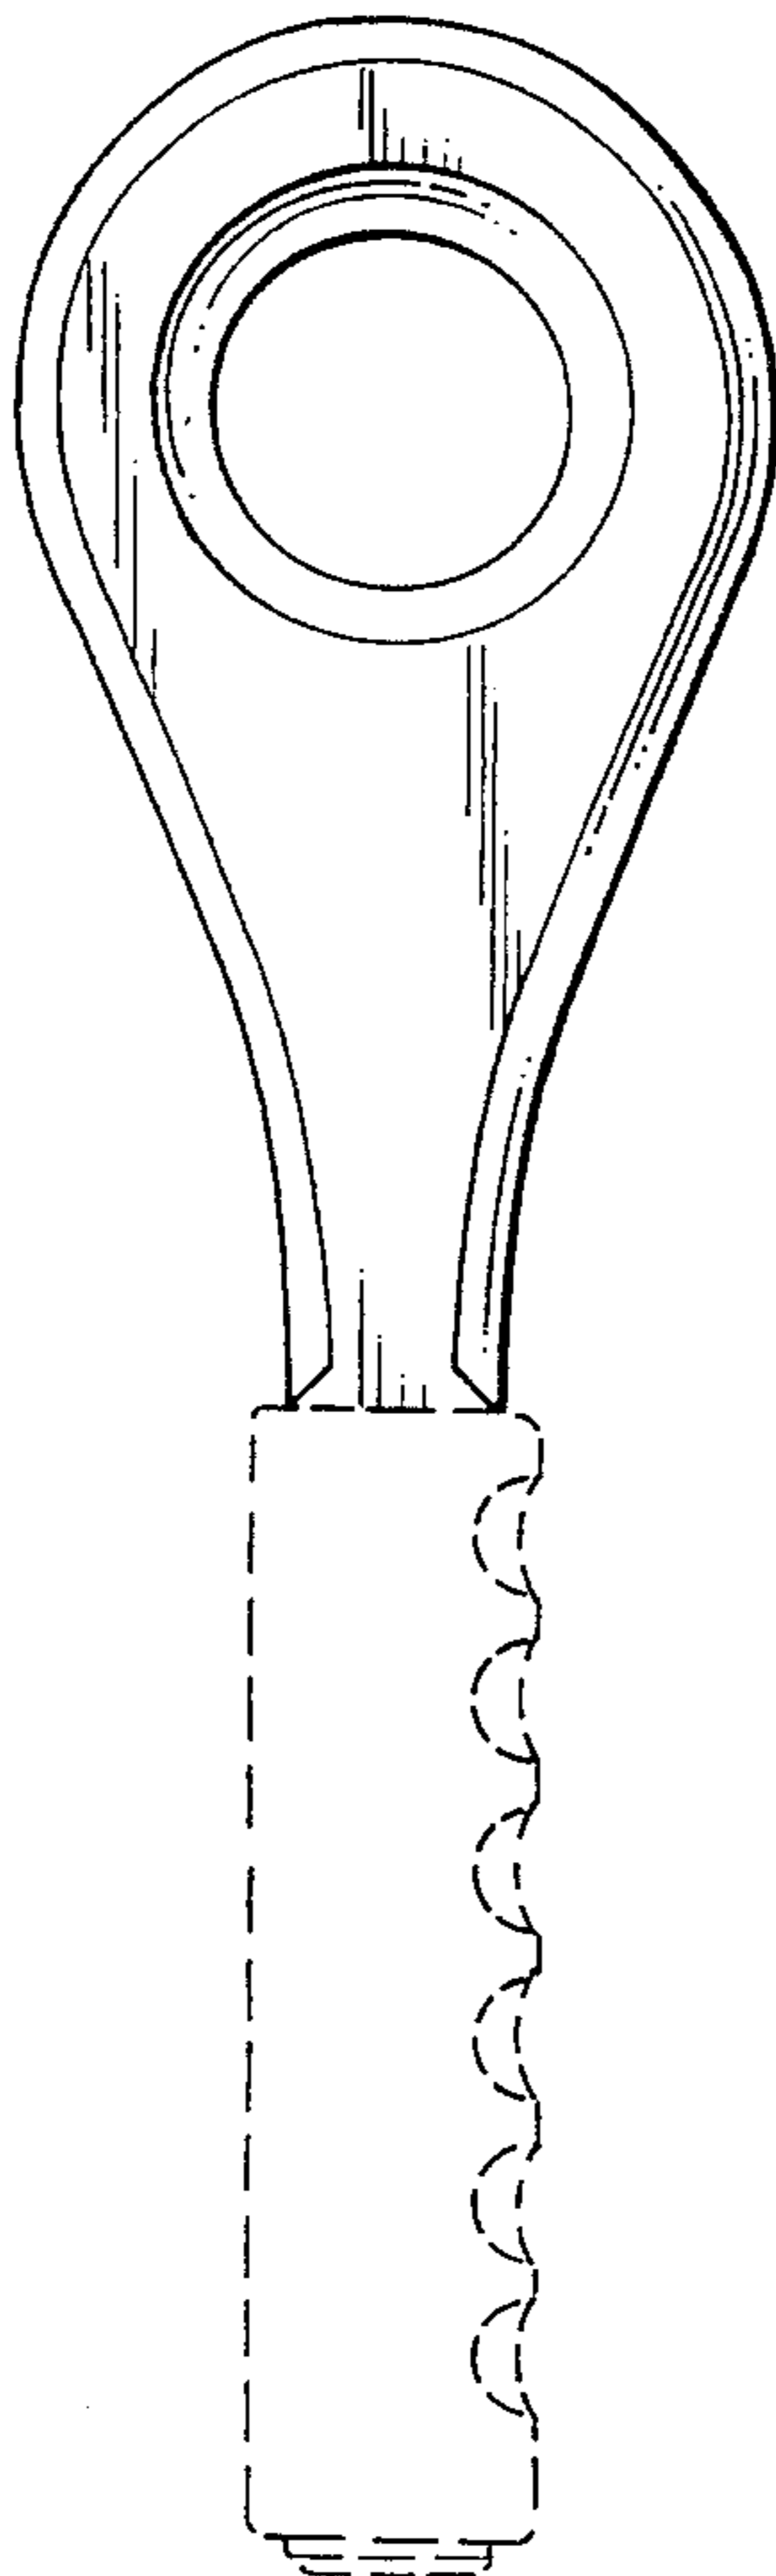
is a right side elevational view of the ball paddle shown in FIG. 1, the undisclosed opposite side being identical;
